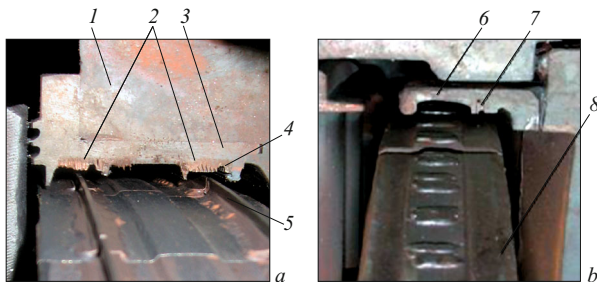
A honeycomb shroud seal for the flow-through section of the high pressure cylinder (a) and a radial shroud seal for the flow-through section of the medium pressure cylinder (c) of a K-200-130 turbine unit after contact wear: 1, yoke of regulator stage; 2, honeycomb assembly; 3, honeycomb seal; 4, depletion of honeycomb surface; 5, shroud collar; 6, diaphragm; 7, stator collar (100% wear); 8, blade shroud.
